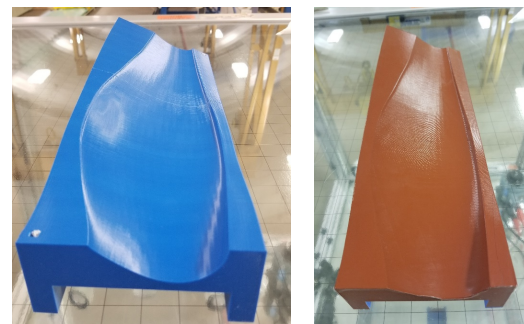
(left) 3D-printed mold, ABS material; (right) 3D-printed mold with Teflon tape surface preparation
